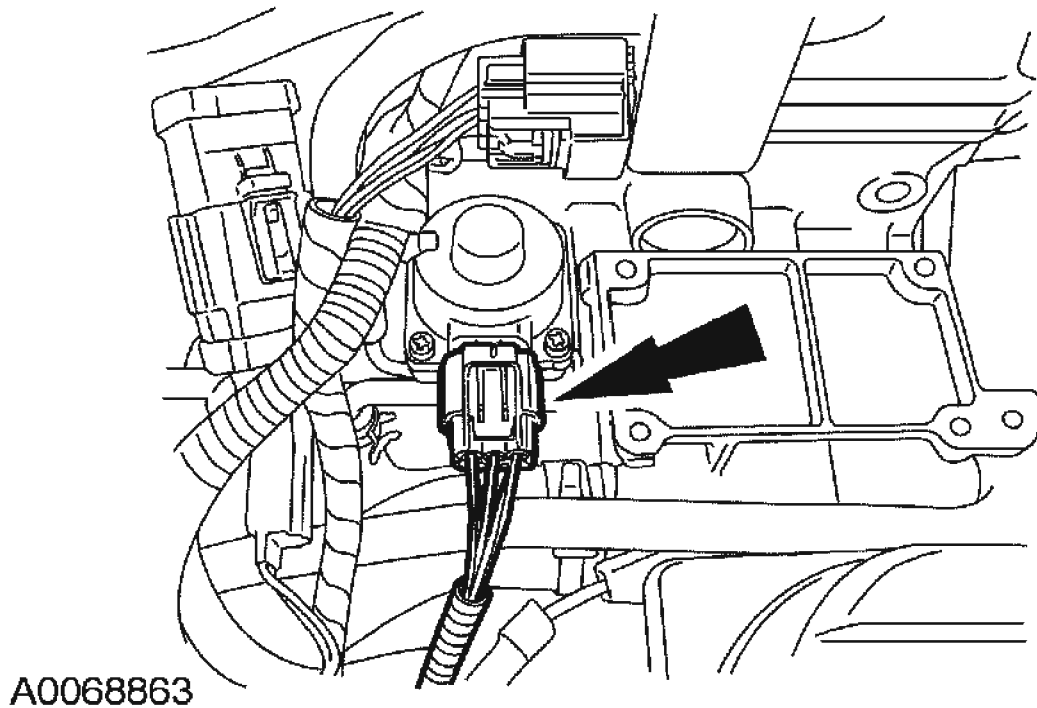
Connecting Exhaust Gas Recirculation Valve Electrical Connector
